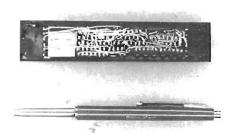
INSIDE VIEW of a probe-type digital frequency meter. Compact construction is due to the "bricklaying" technique.
